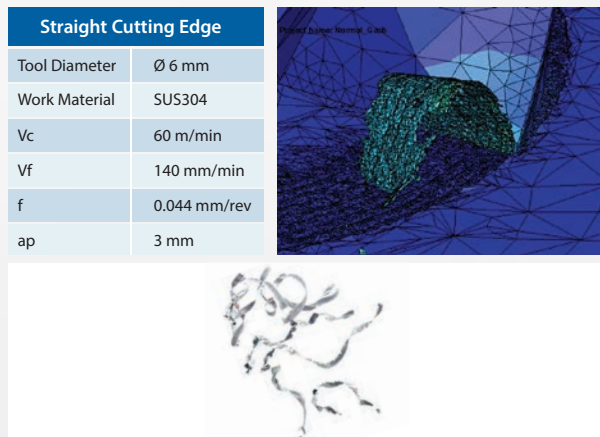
Cutting chips created by an end mill with conventional (straight) cutting edge from plunging in SUS304.
